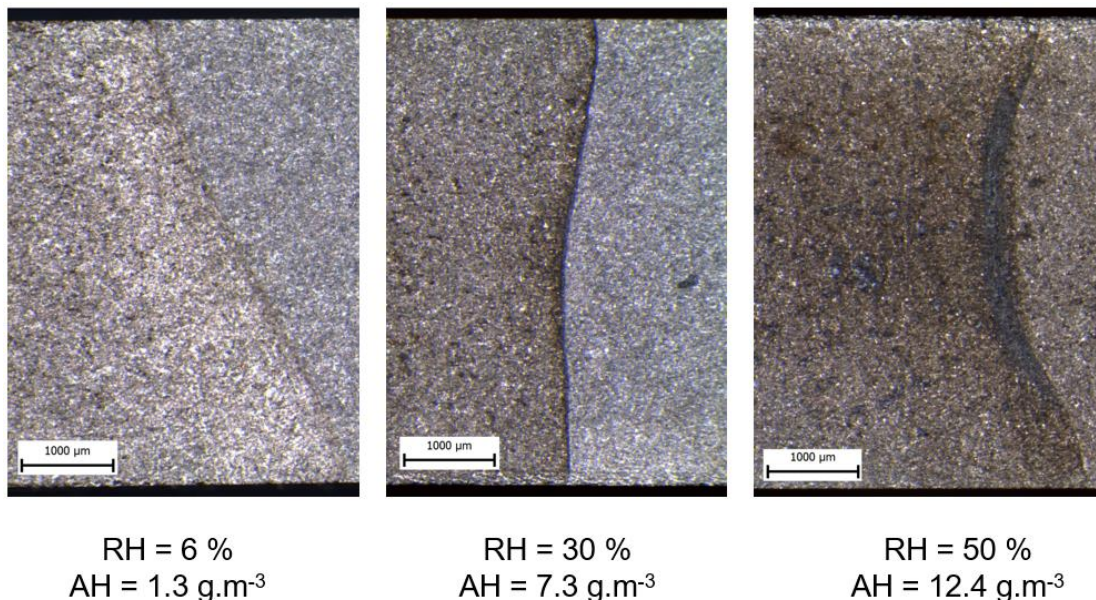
Fracture surfaces of specimens tested under different humidity conditions (abbreviations RH = relative humidity, AH = absolute humidity)
